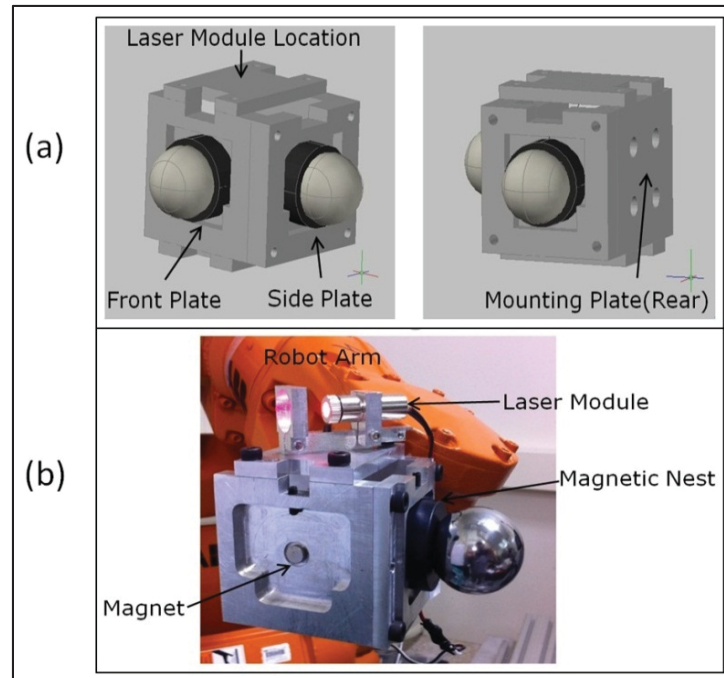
Fixture design for test on the robot: (a) CAD model of the fixture, (b) image of the fixture in the experiment.
